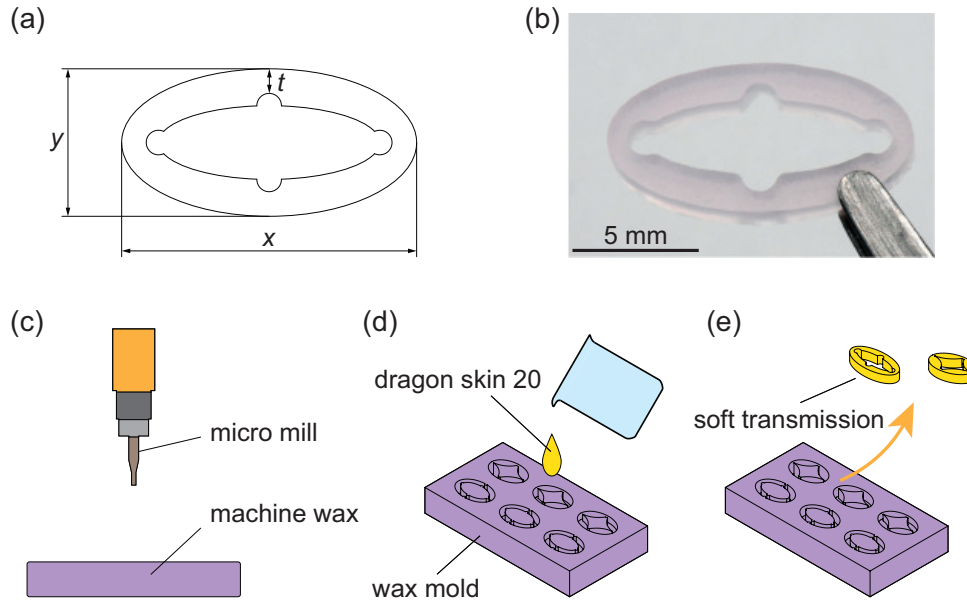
Soft transmission design and fabrication. (a) Transmission dimensions. (b) Silicon rubber soft transmission. (c) Building mold using micro mill. (d) Casting with *Dragon Skin 20*. (e) Remove parts from mold.
